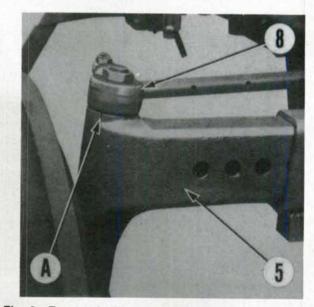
Front axle (5) and steering arms (8) are marked (A) during production to indicate correct toe-in setting with front wheels in straight ahead position.
